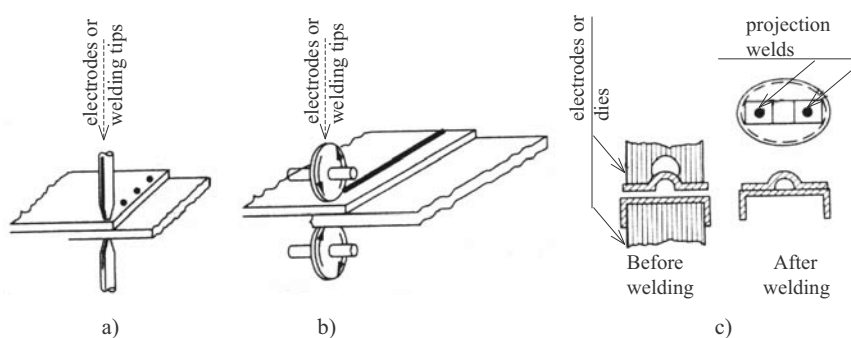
Resistance welding procedures: (a) spot welding; (b) seam welding; (c) projection welding
